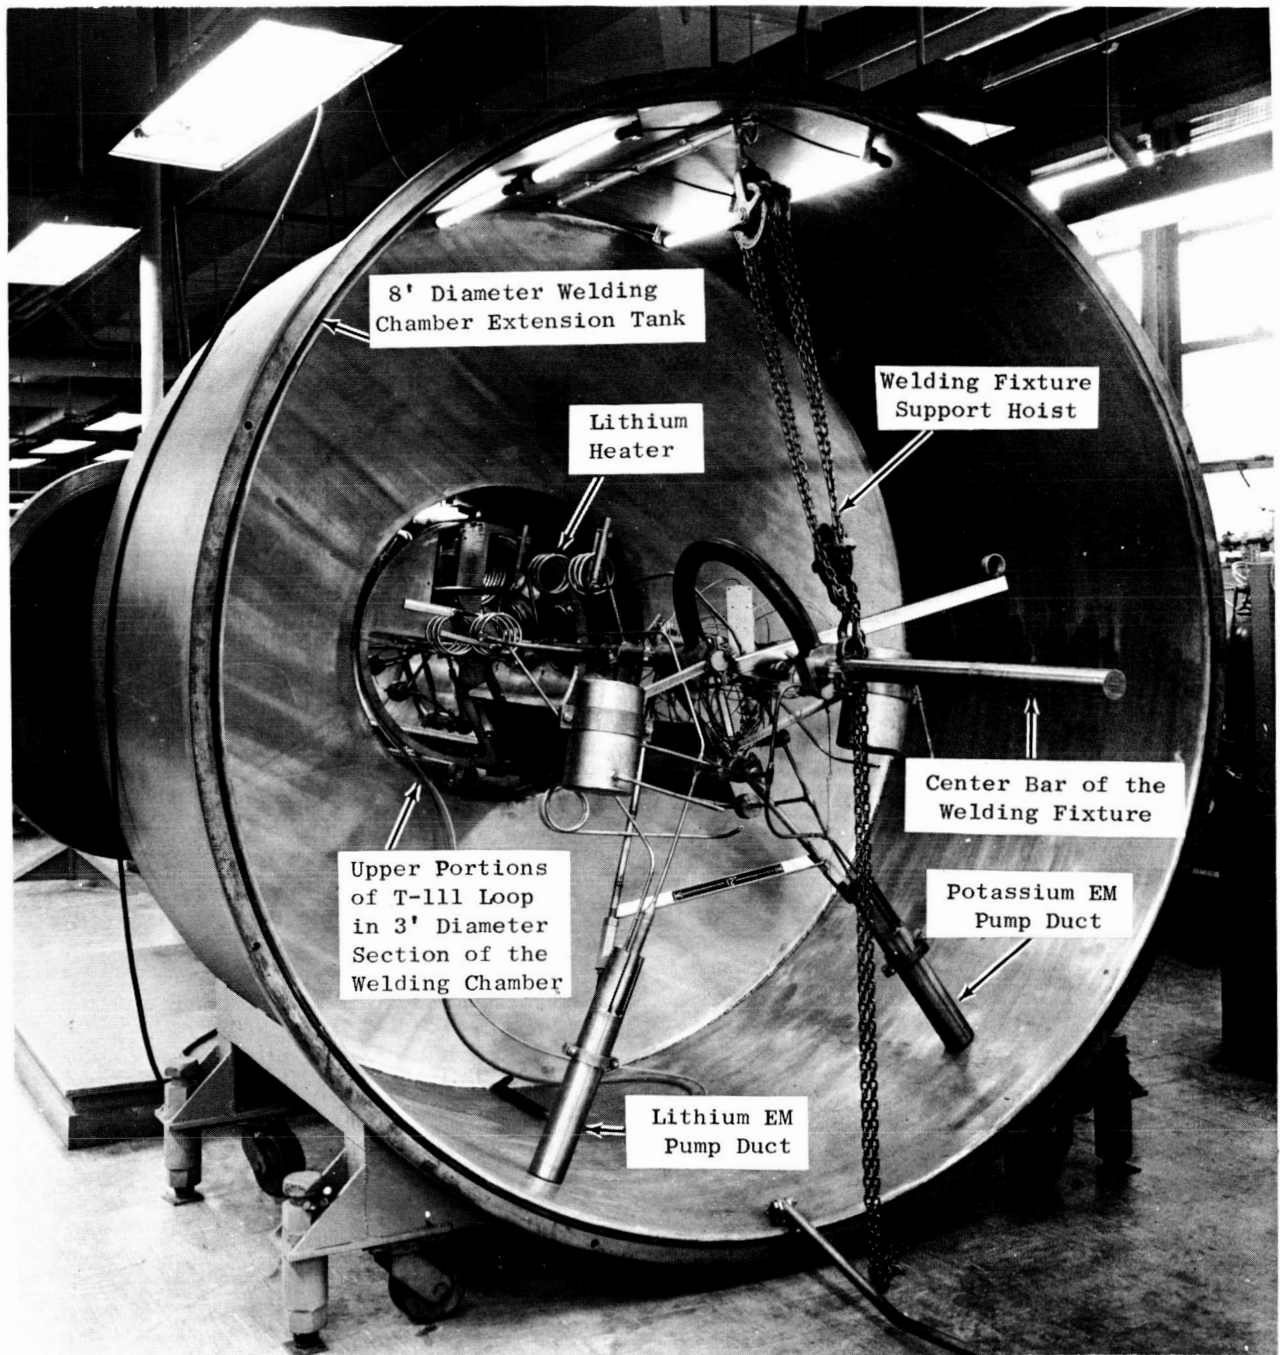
T-111 corrosion test loop mounted on welding fixture prior to final welding and weld heat treatment operation.
